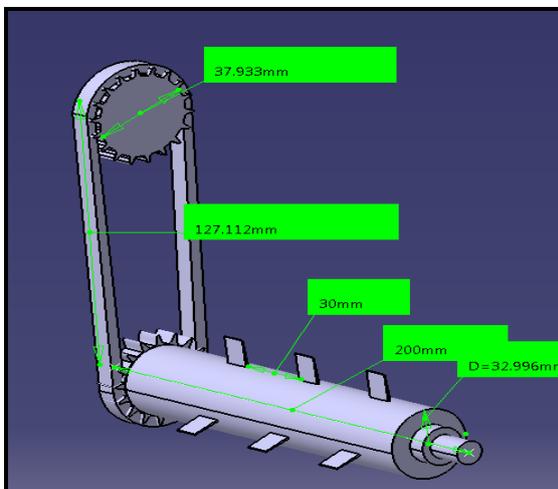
Chain-Sprocket and Digging Tool Arrangement
